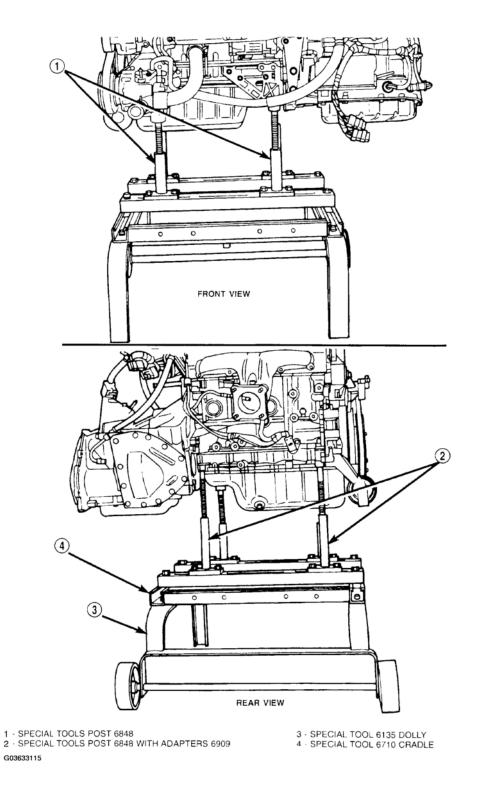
Positioning Engine Cradle Support Post Mounts Courtesy of DAIMLERCHRYSLER CORP.
